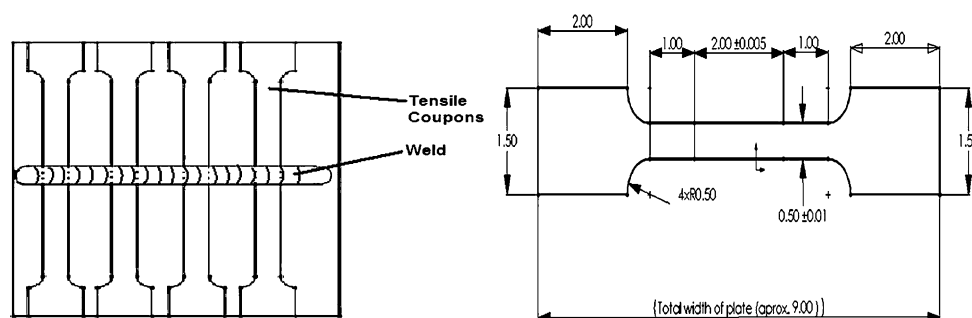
Tensile coupon layout-orientation and dimensions. Weld width is ~22 mm
